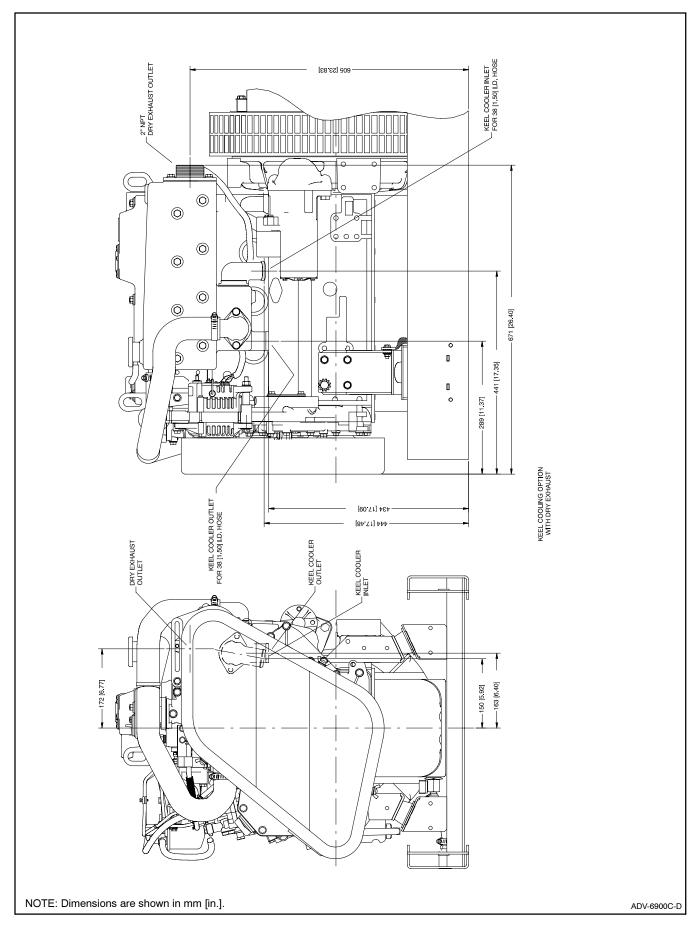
Dimension Drawing, 28/32EOZD and 23/27EFOZD with Keel Cooling
